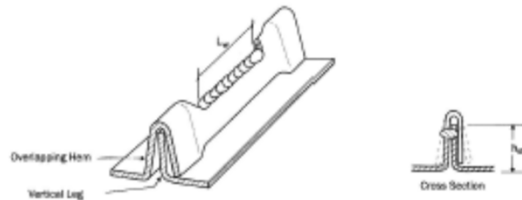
Top Seam Weld - Vertical Leg and Overlapping Hem Joint
